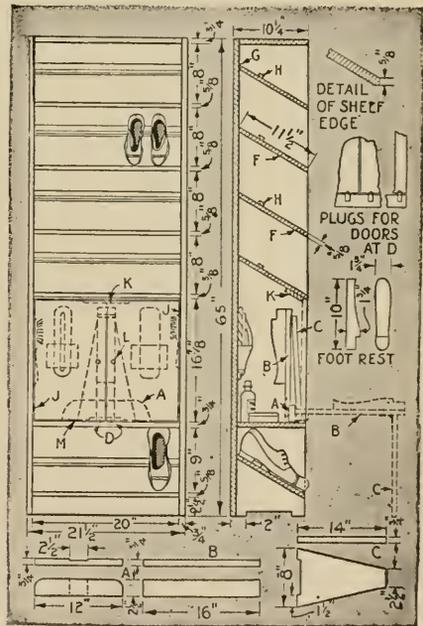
Assembly views of the shoe case and polishing outfit. Note the position of the foot-piece bracket when folded and when open.
